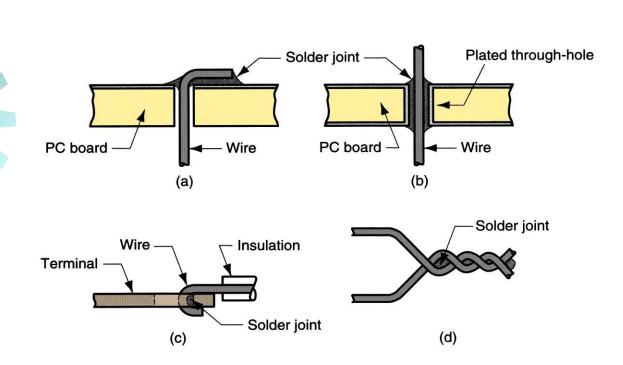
Techniques for securing the joint by mechanical means prior to soldering in electrical connections: (a) crimped lead wire on PC board; (b) plated through-hole on PC board to maximize solder contact surface; (c) hooked wire on flat terminal; and (d) twisted wires.
